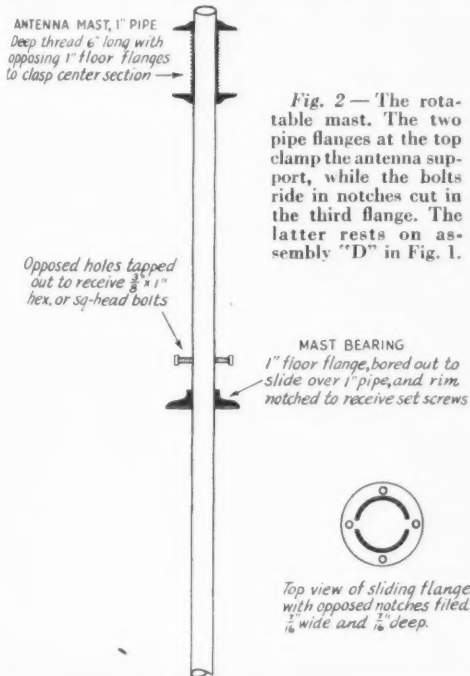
The rotatable mast. The two pipe flanges at the top clamp the antenna support, while the bolts ride in notches cut in the third flange. The latter rests on assembly "D" in Fig. 1.
